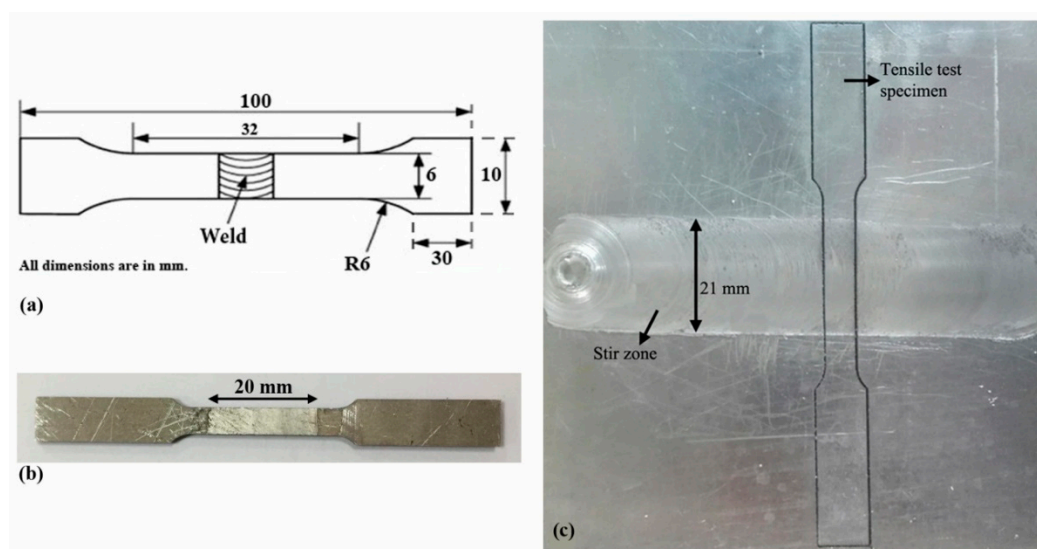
(a) Schematic design of the tensile test specimen, and (b) tensile test specimen for FS- and (c) FSV-welded specimens.
